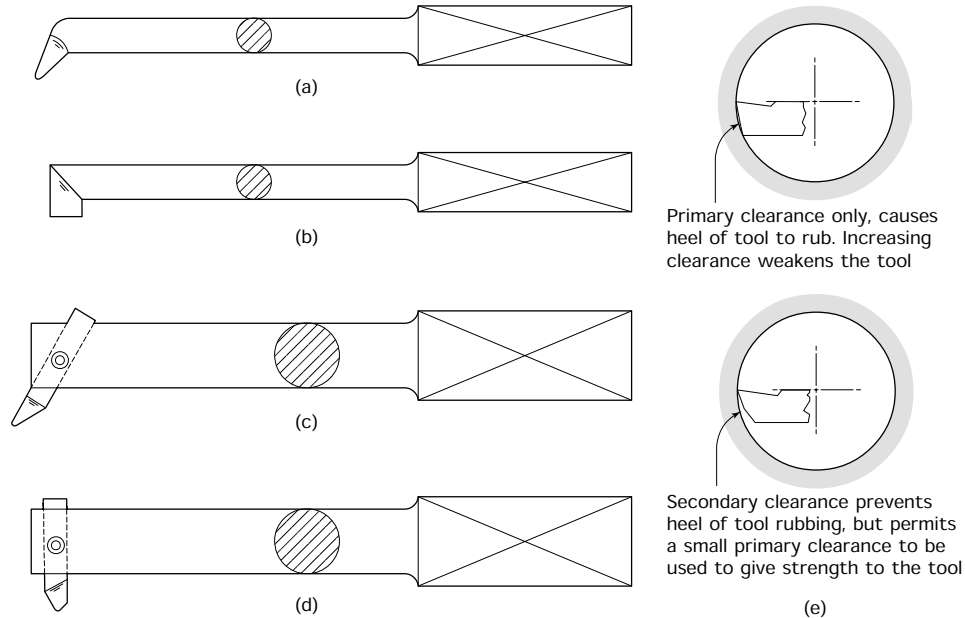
Centre lathe boring tools: (a) solid bottoming tool for blind holes; (b) solid roughing tool for a through hole; (c) boring bar with inserted tool for bottoming a blind hole; (d) boring bar with inserted tool for roughing a through hole; (e) need for secondary clearance
